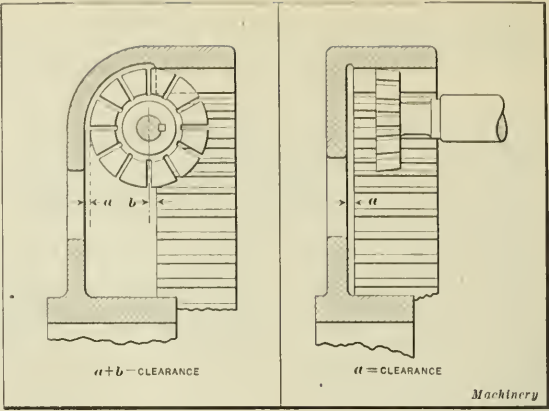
Internal Spur Gear cut with Rotary Cutter
